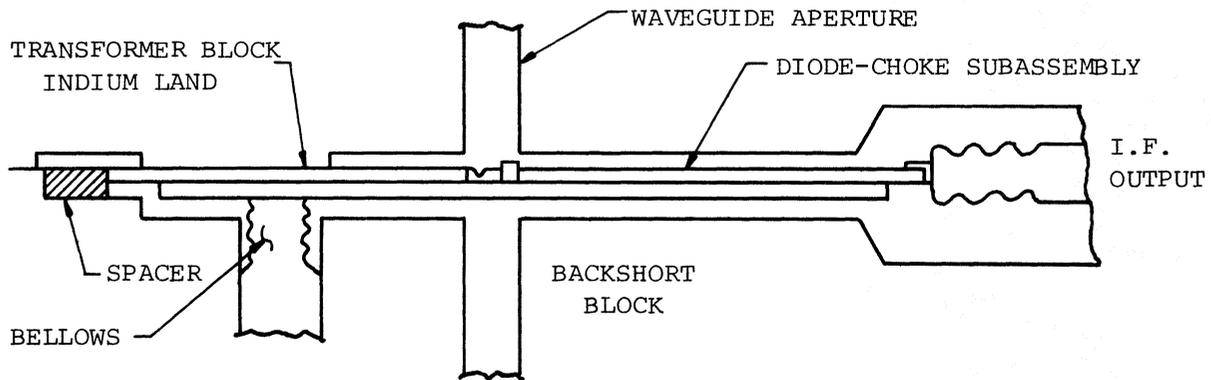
Diode-Choke Subassembly Mounted in Mixer Block
